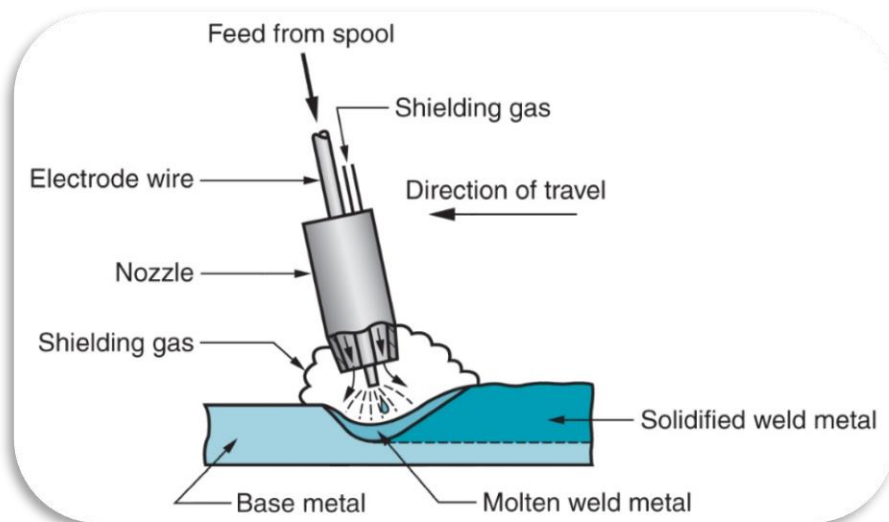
Gas metal arc welding (GMAW) set up
